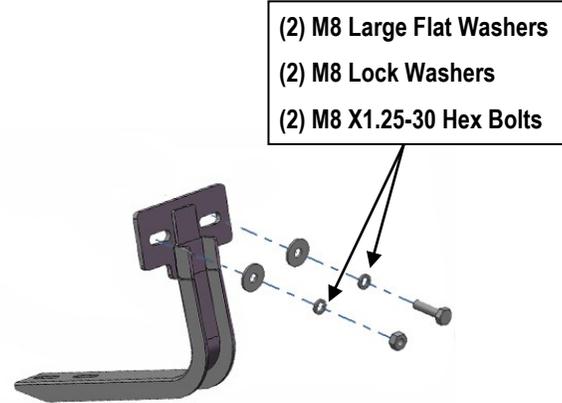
Driver Side Front Mounting Location mid 15-on
